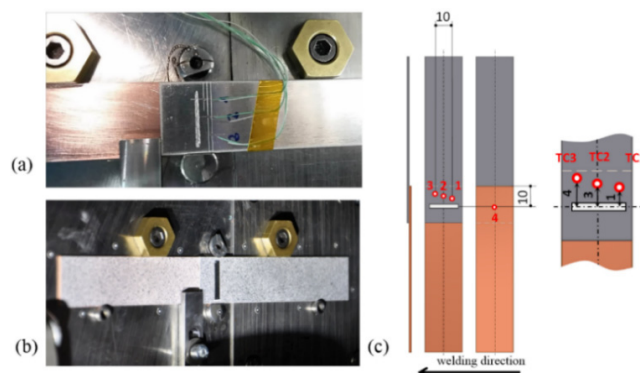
Test bench setup for Al-Cu overlap joints; (a) positions of thermocouple measurement; (b) applied stochastically distributed pattern for optical measurement of welding distortions; (c) scheme: position of thermocouple for Al-Cu overlap joint configuration.
